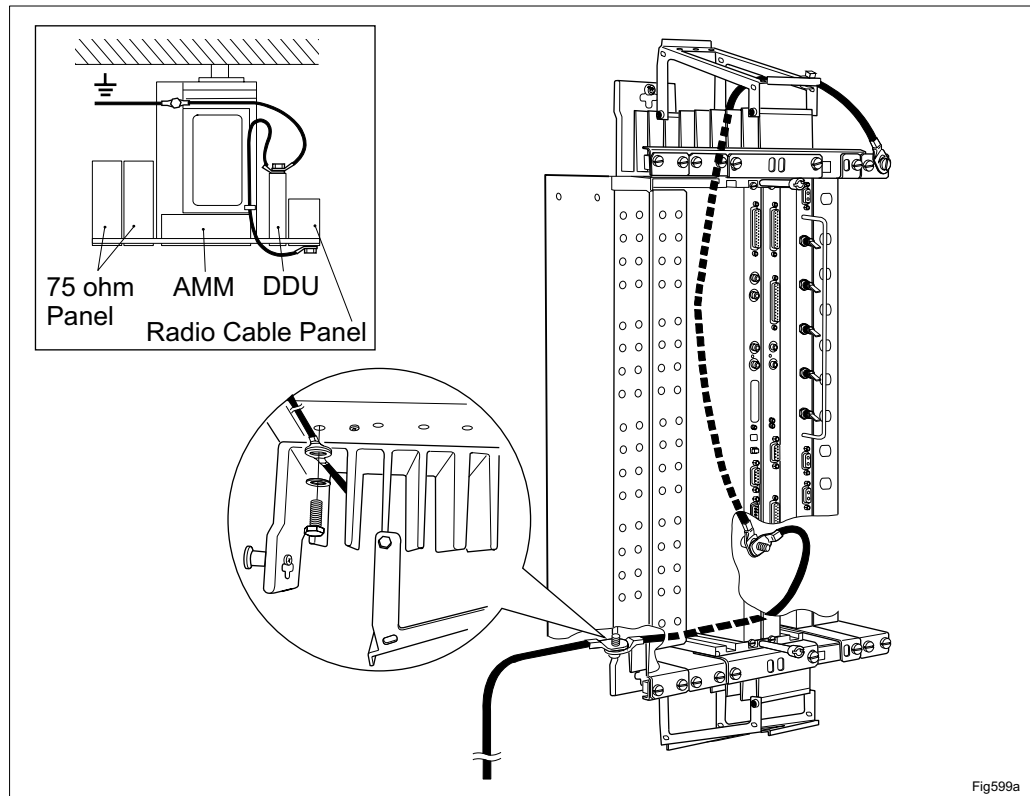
Earthing cabling for wall installation of a 2U-3 Magazine.
